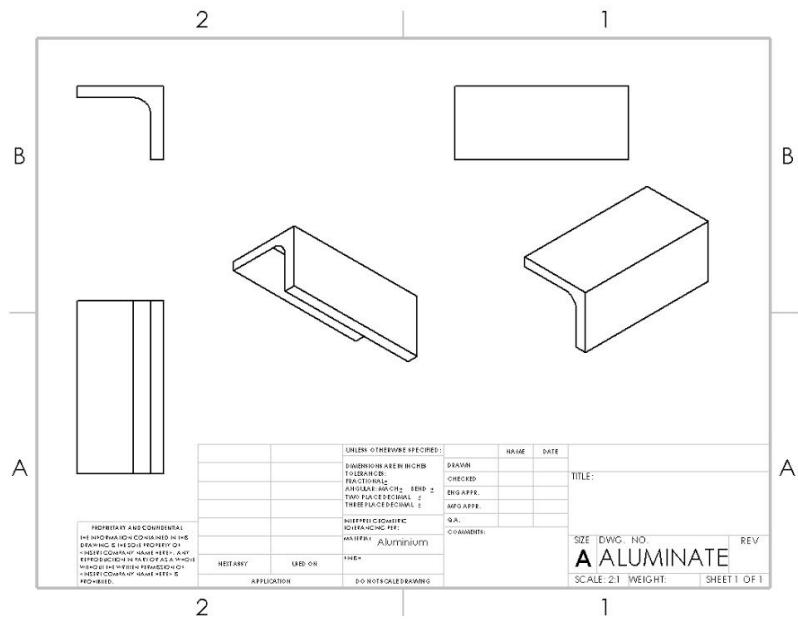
Solidworks drawing of the Faraday Case Prototype 3.0 - Locking mechanism
